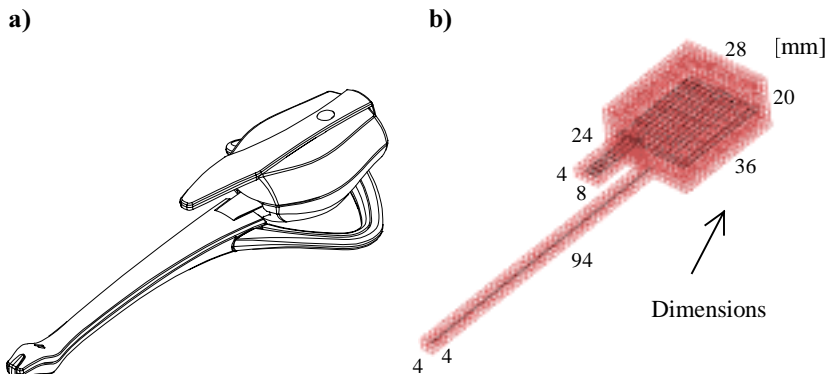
a) A drawing of the Bluetooth headset b) The same headset modeled in XFDTD with the outer dimensions given.
